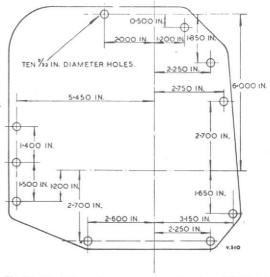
Blank for valve group mounting face (48 Mk. 2)
